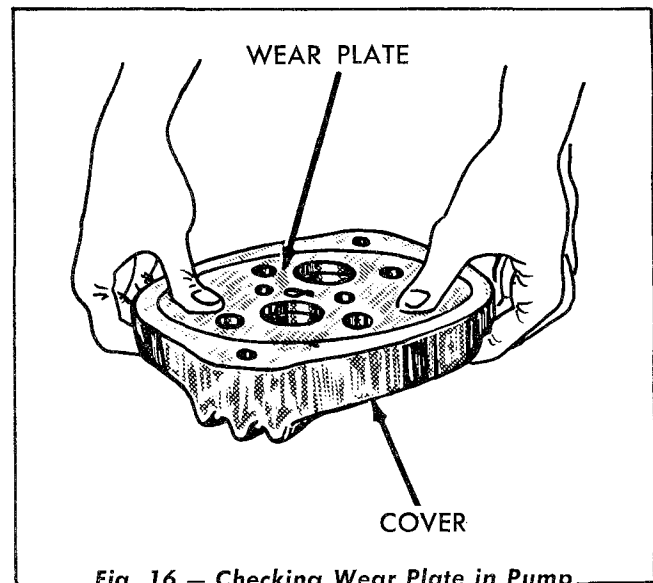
Checking Wear Plate in Pump Cover for Proper Seating
